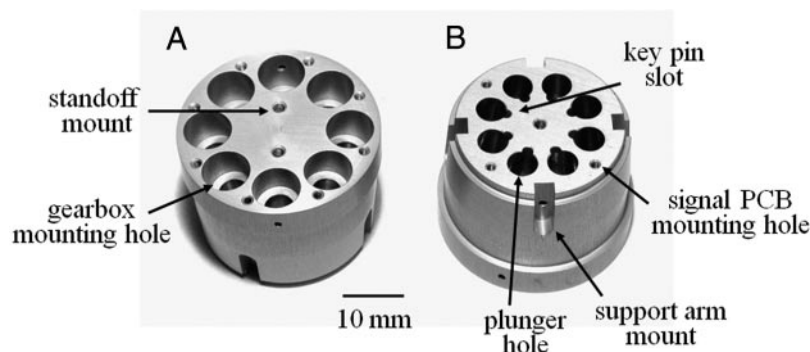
Photographs of a completed actuator block as viewed from the top (A) and bottom (B).
